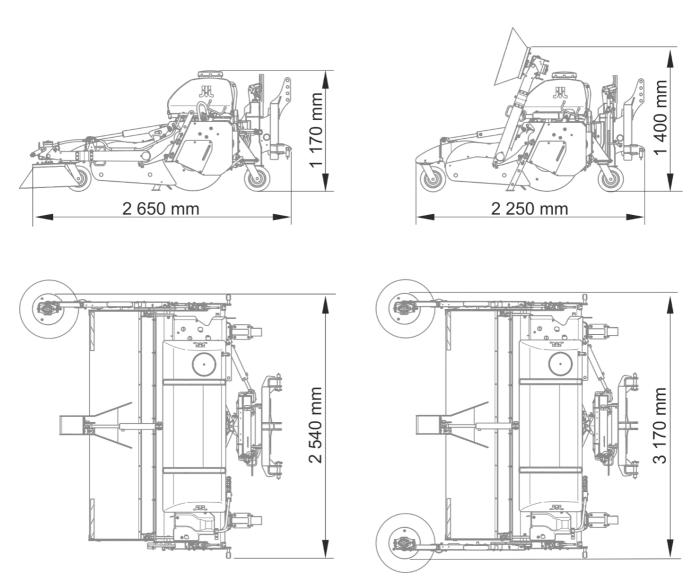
External dimensions depending on the machine version dimensions of the three-point linkage
